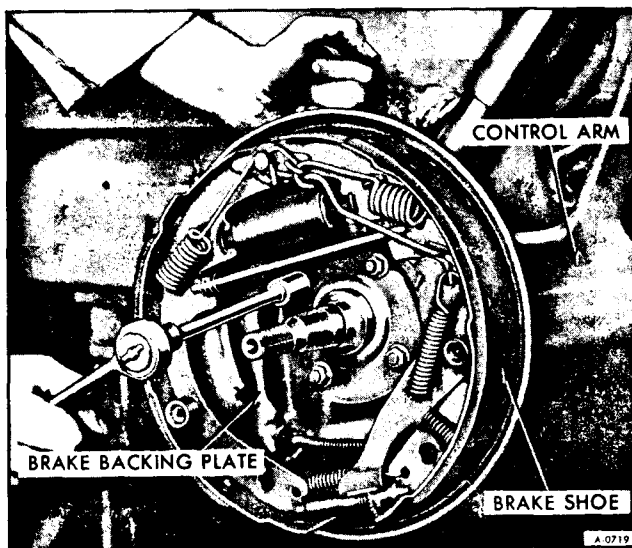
Removing Brake Backing Plate and Brake Shoe Assembly
